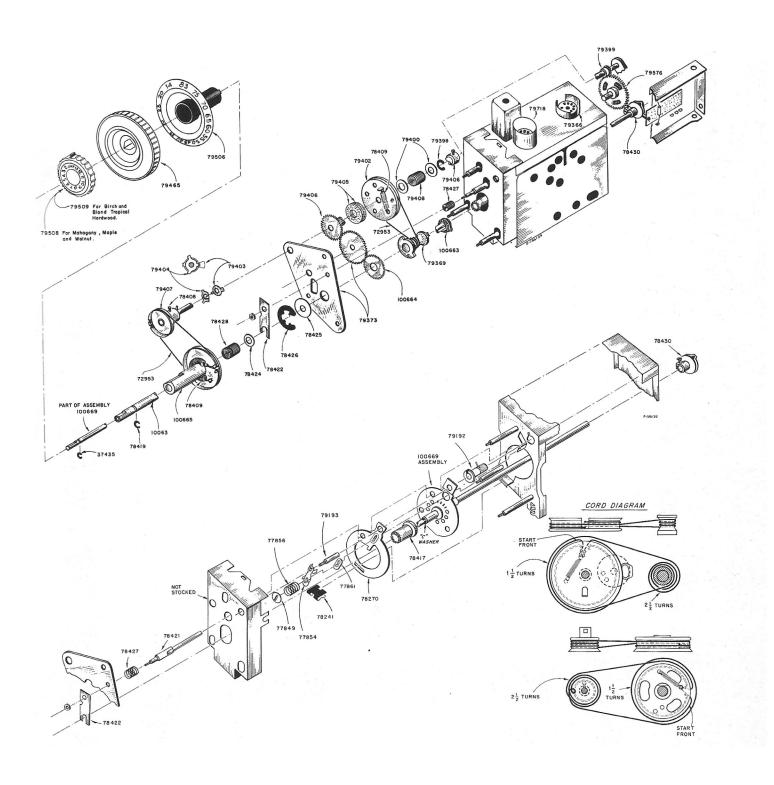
KRK-37 UHF-VHF Tuner Unit-Assembly Detail
